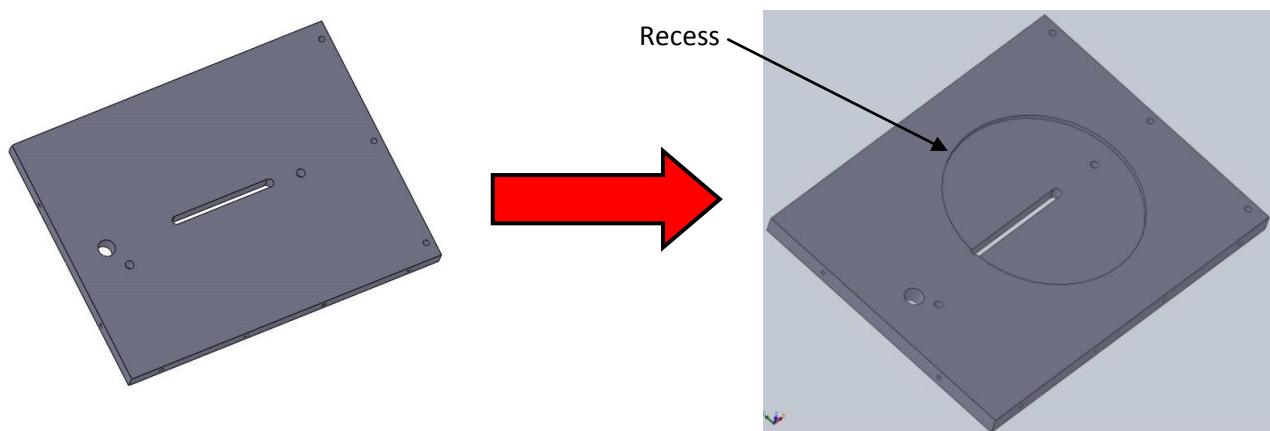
Evolution of the Laser Assembly Mounting Plate Design
